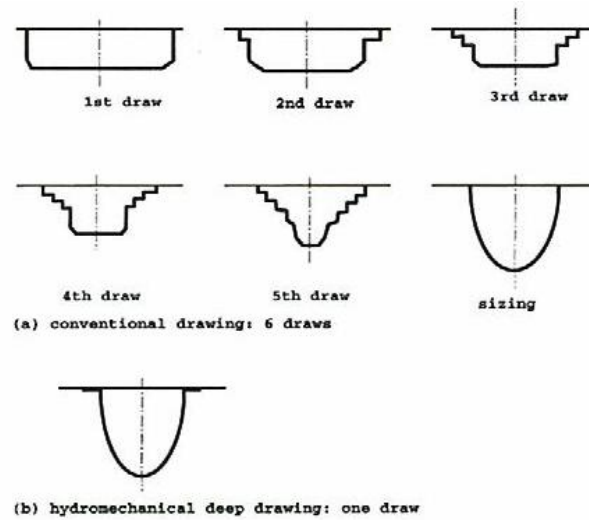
Conventional Drawing vs Sheet Hydroforming (Derived from Aust)
